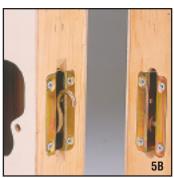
A & 5B The Type 3 Latch S1500-3-1.000 and the Receiver R500-3-500 are shown in this cut away view of a flange-to-flange mounting in 3/4"/19mm thick framing. This places the access hole behind the frame. This is the most frequently used Norse Latch/Receiver combination for exhibit fabrication (See TDS 108)
